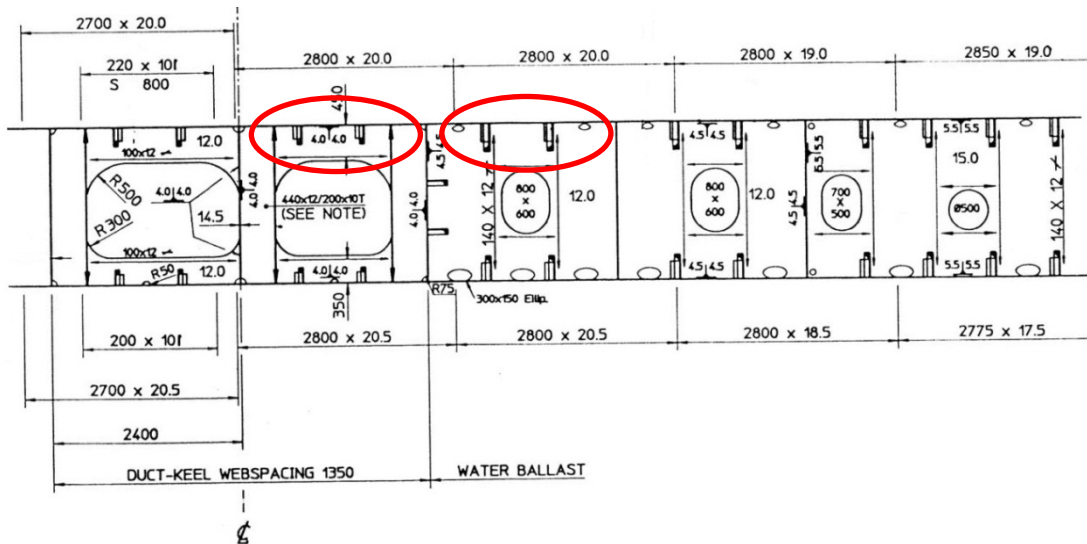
Detail description of Inner Bottom, Web frame plating
